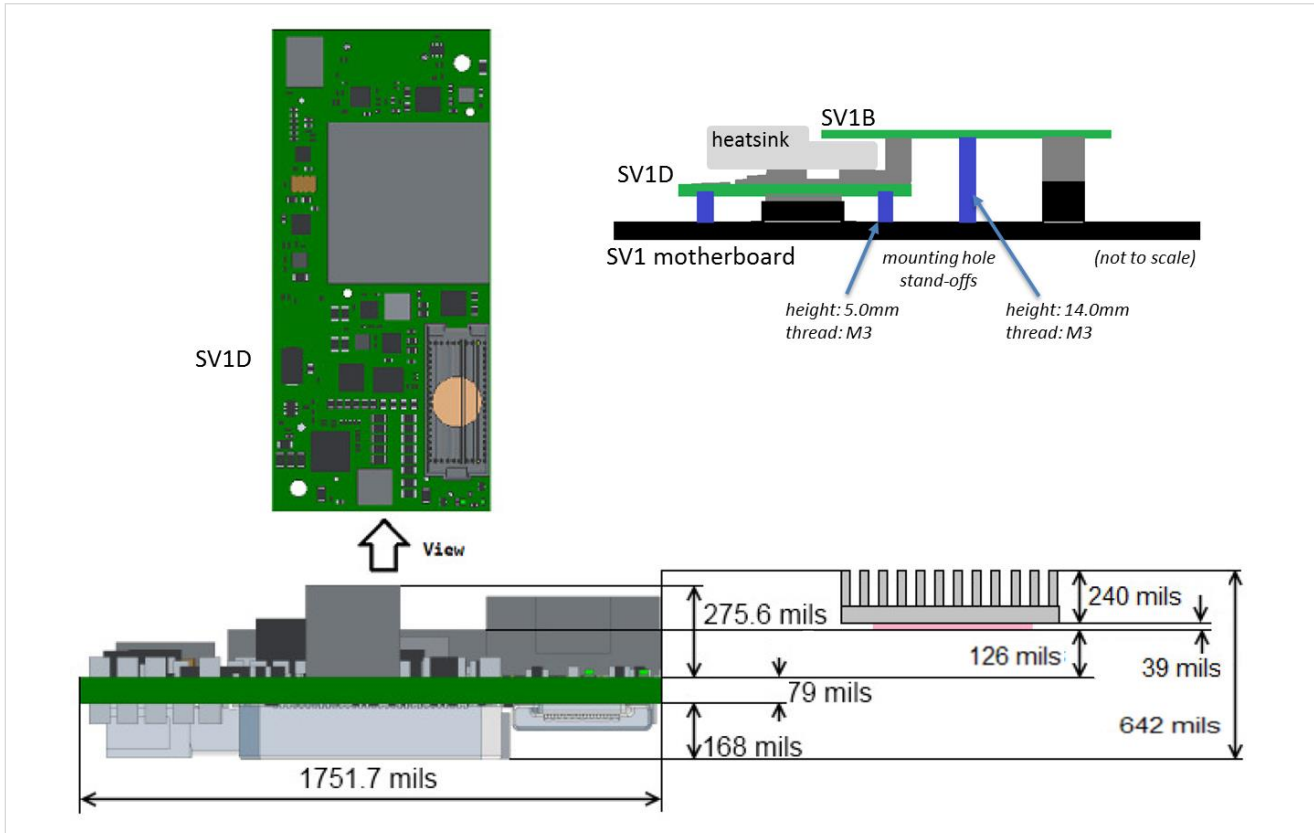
Top view and side profile of the SV1M showing its relief and the total height with the included heat sink. Inset figure depicts the side view of the assembled SV1B, SV1D and the motherboard.
